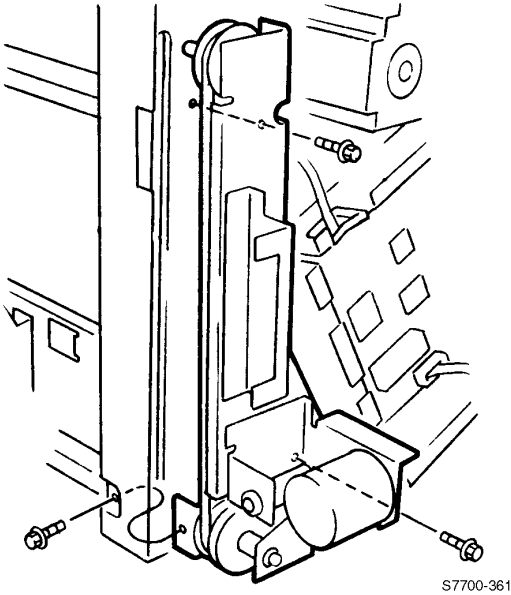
Finisher Control Board, Bracket, and Shield
